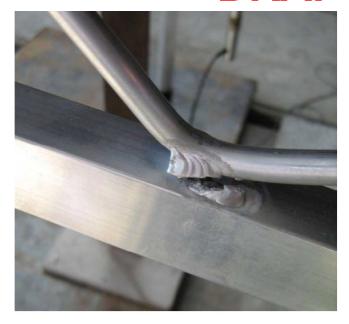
Failure of Welds of Global Truss Performer Stage
